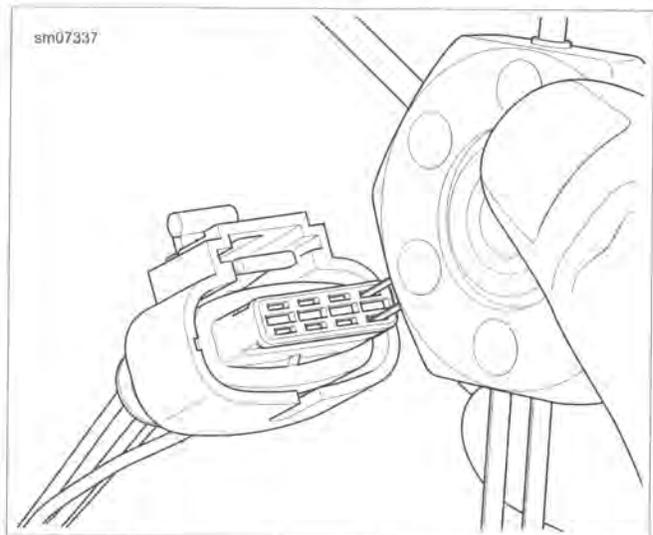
Terminal Removal: Bosch Compact 1.1M Connector
